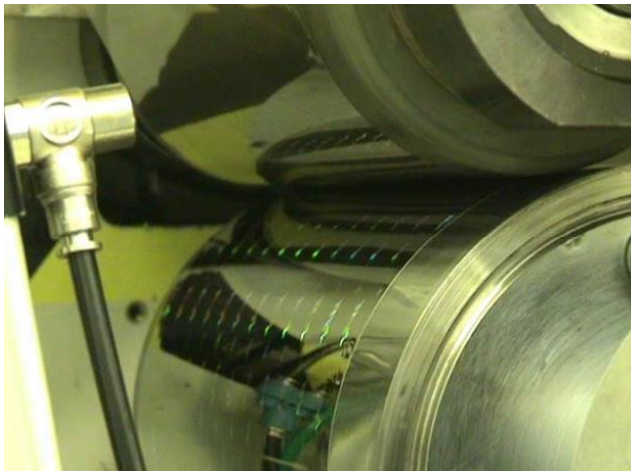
Roll-to-Roll Hot Embossing of refractive elements (Photo courtesy of VTT Finland)
